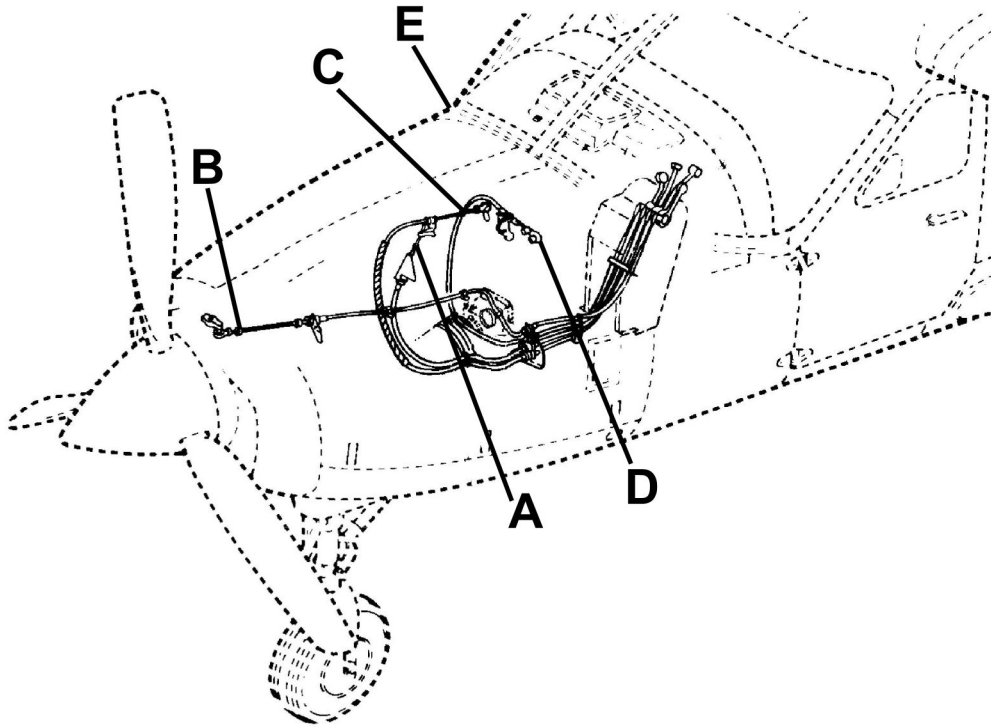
Rod End Bearing Inspection/Replacement (Sheet 1)
